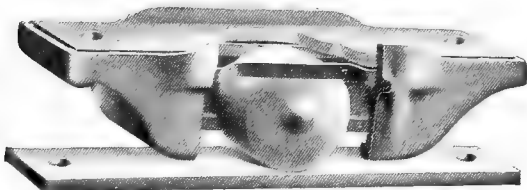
Passenger Train Car Side Bearing Showing Roller and Springs. Edwin S. Woods & Company.
